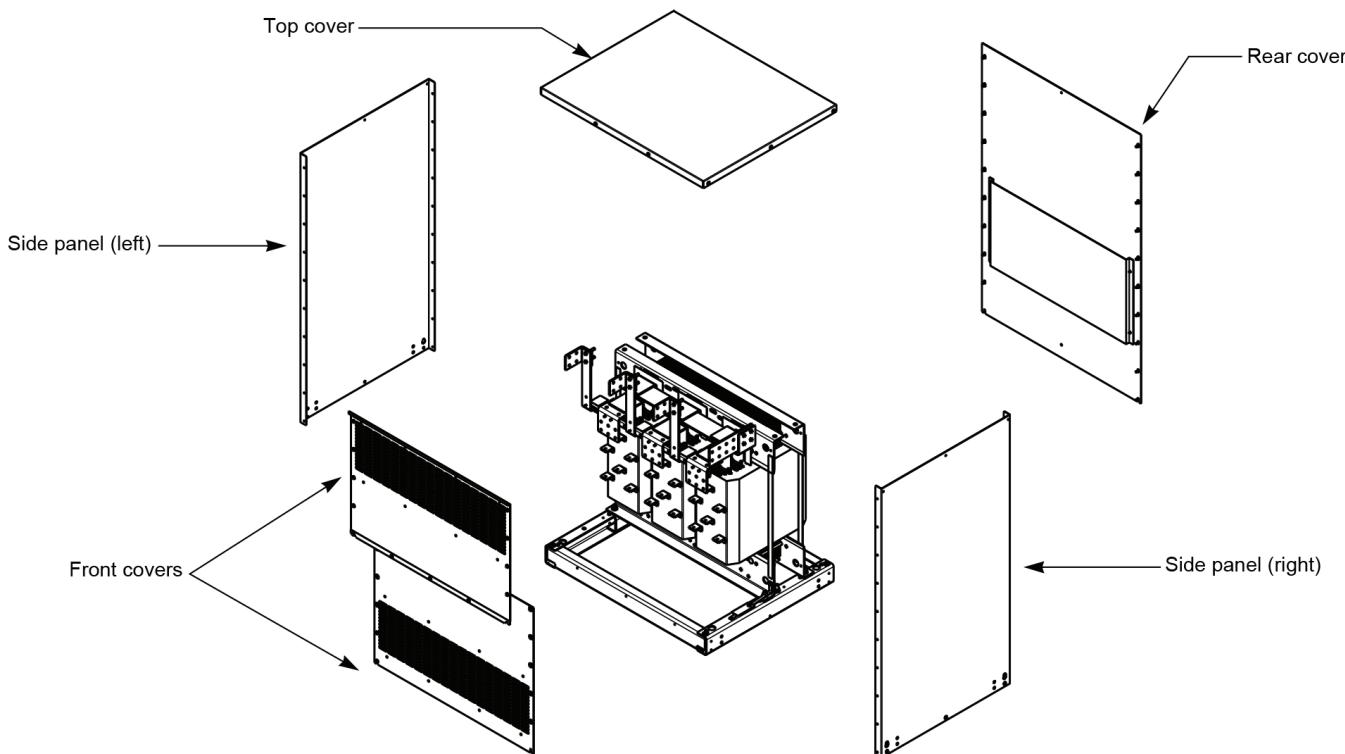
Exploded Assembly for EX300T3H Energy Efficient Transformer with Enclosure Style 25J Front
